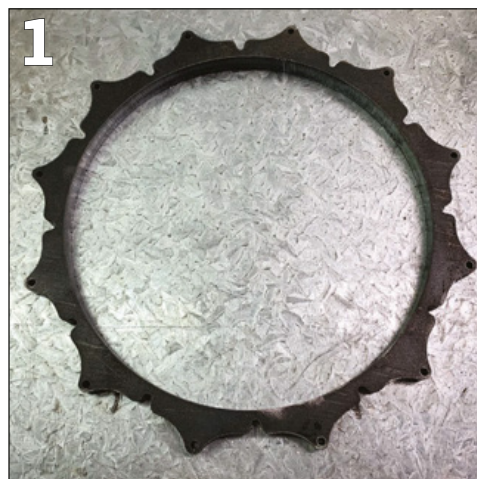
5-inch gauge brake-block ring after drilling but prior to machining – up to 12 brake-blocks can be made from this.
